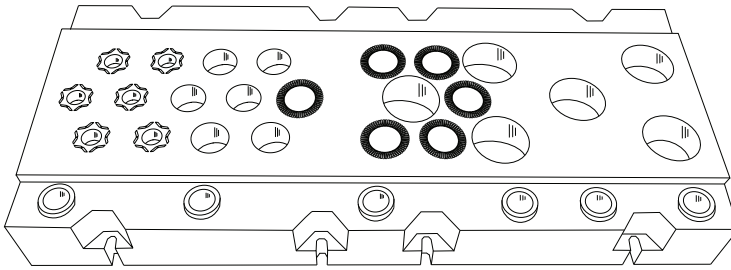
A multi-stage blanking tool, producing six stators and rotors per stroke.
